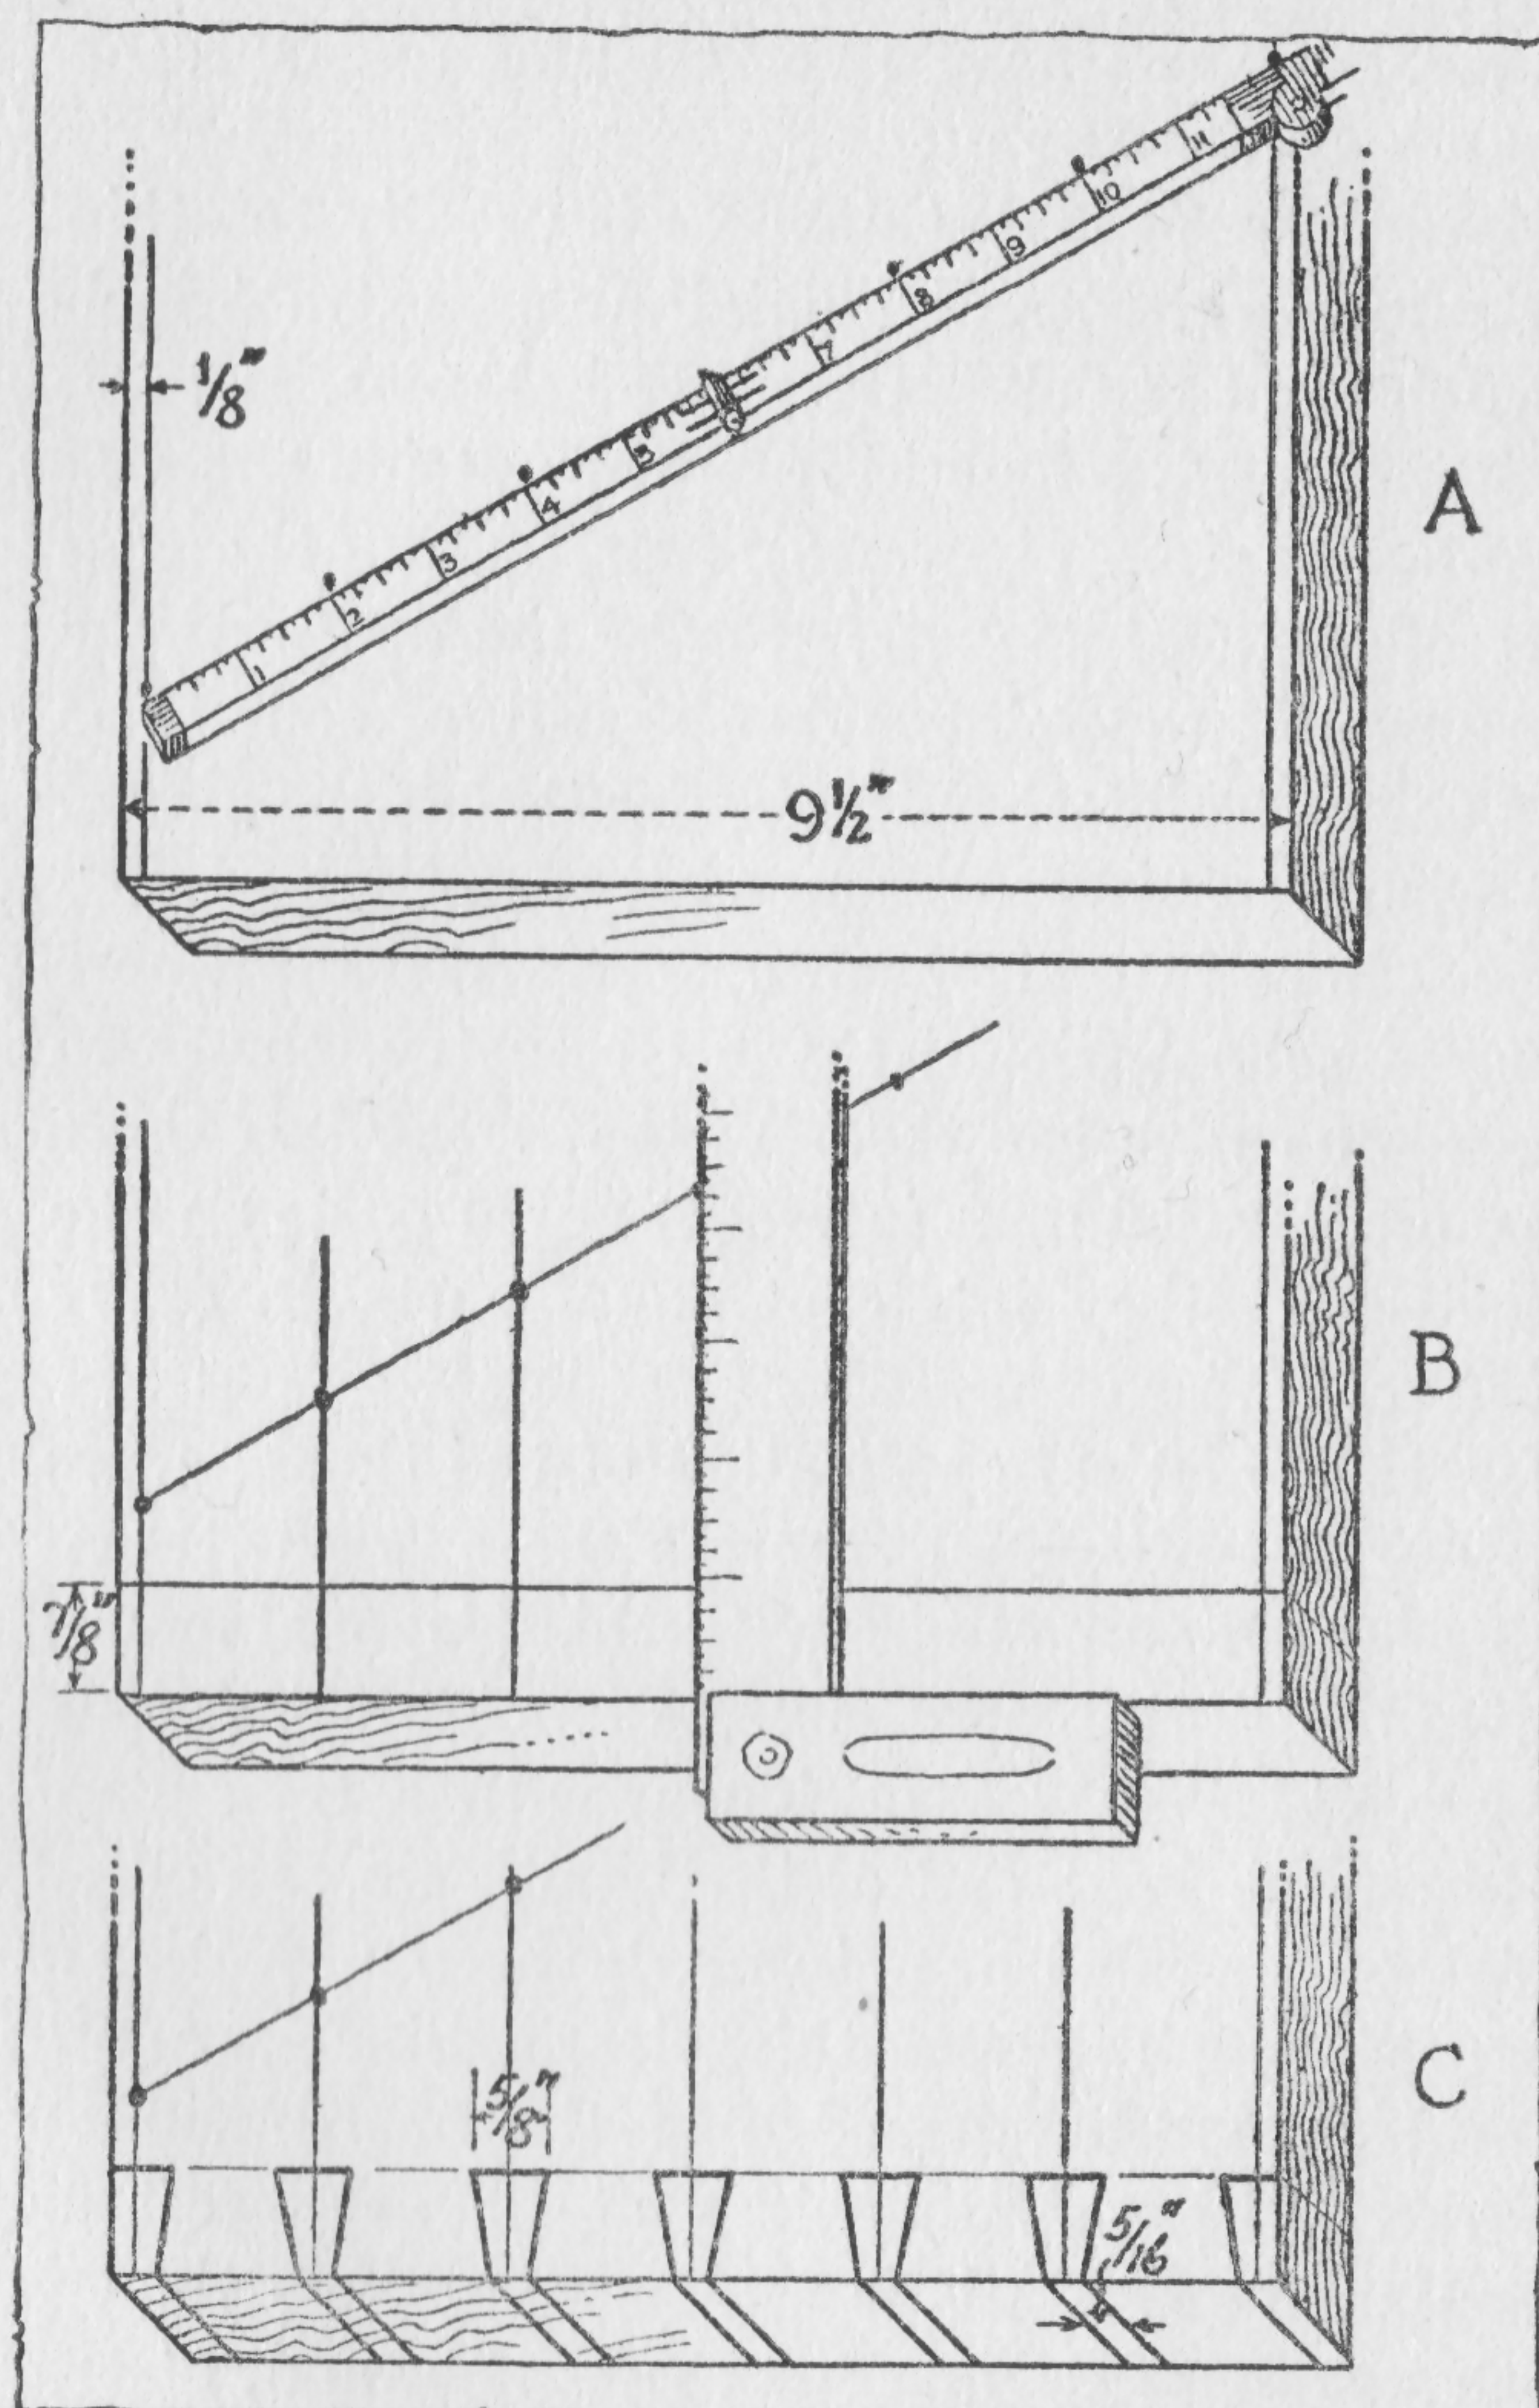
The three steps in marking out sockets for a dovetail joint between the front and side of a drawer.
